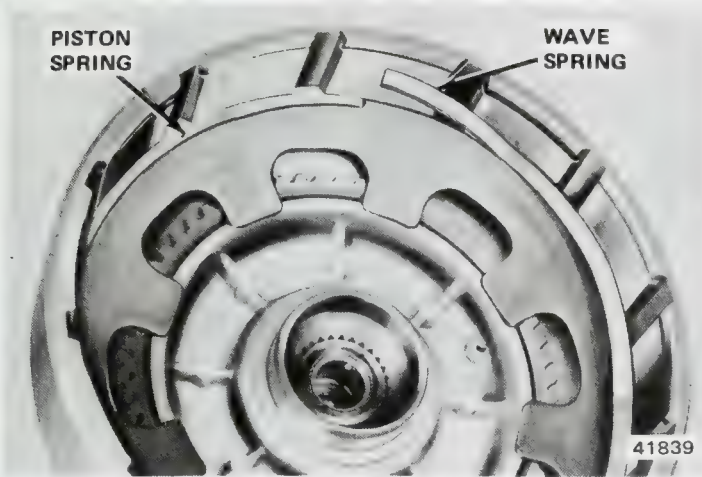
C-83 Clutch Piston Spring and Wave Spring Installation
